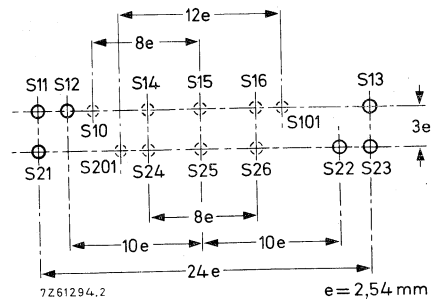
Hole pattern in the printed-wiring board for a tandem potentiometer (viewed on component side).
